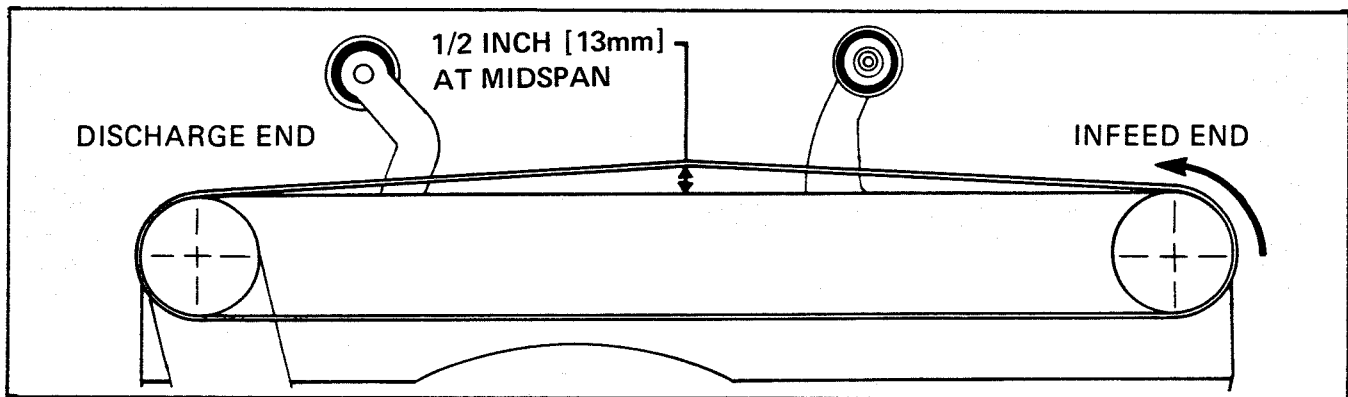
B - Box Drive Belt Tension Adjustment - Lower Taping Head Shown
